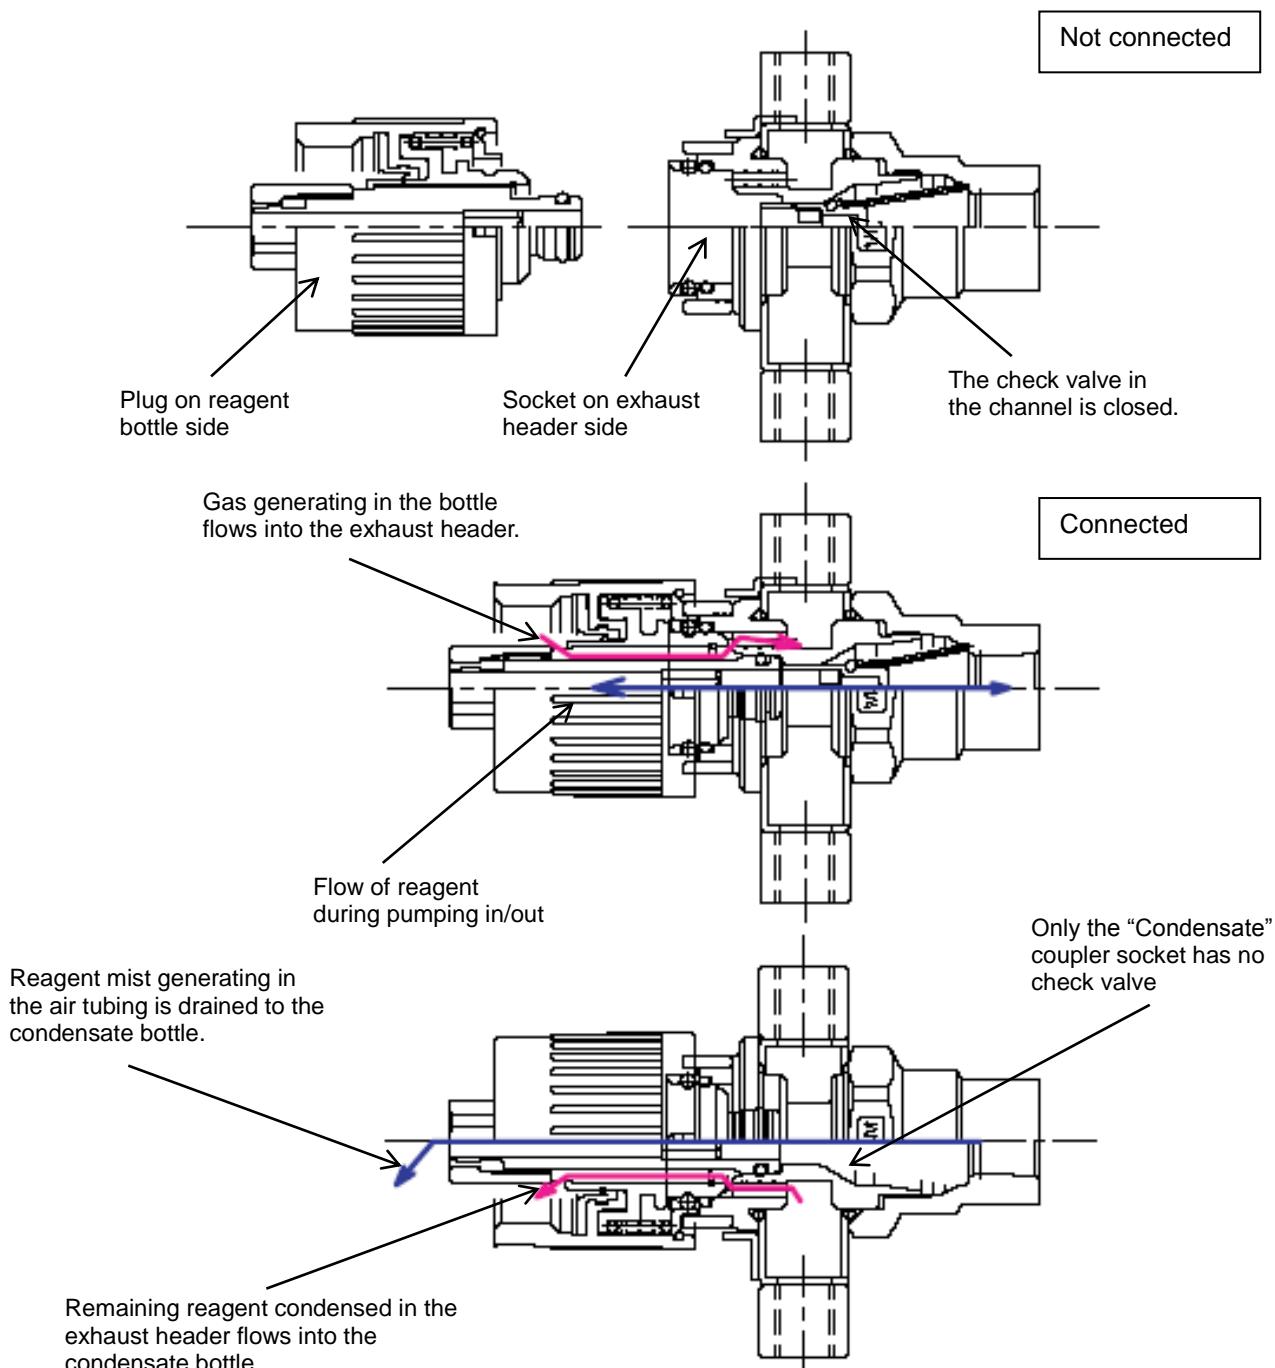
TN Tank Coupler and Exhaust Manifolds
